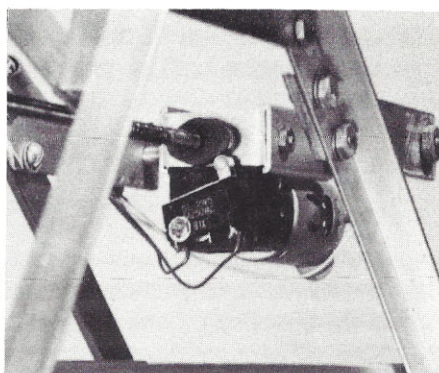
Front view of shoulder servo showing the counter cam and roller lever switch.
